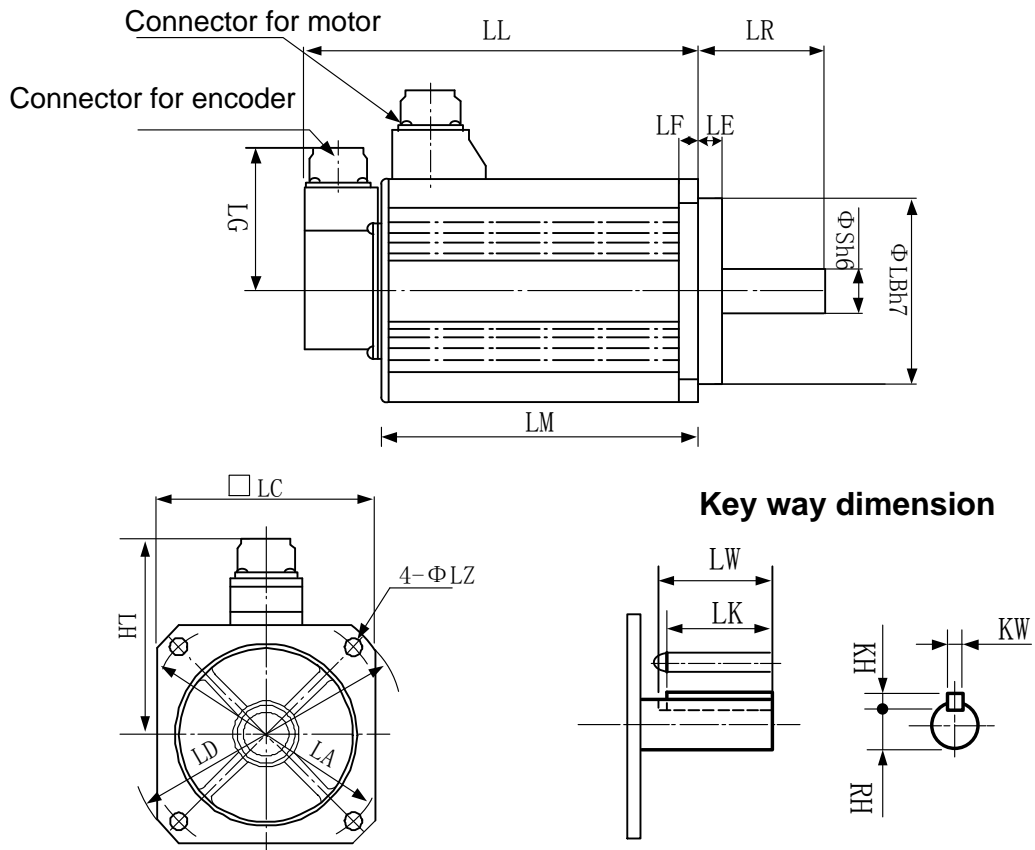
Outline dimensional drawing of MDME/MHME series
